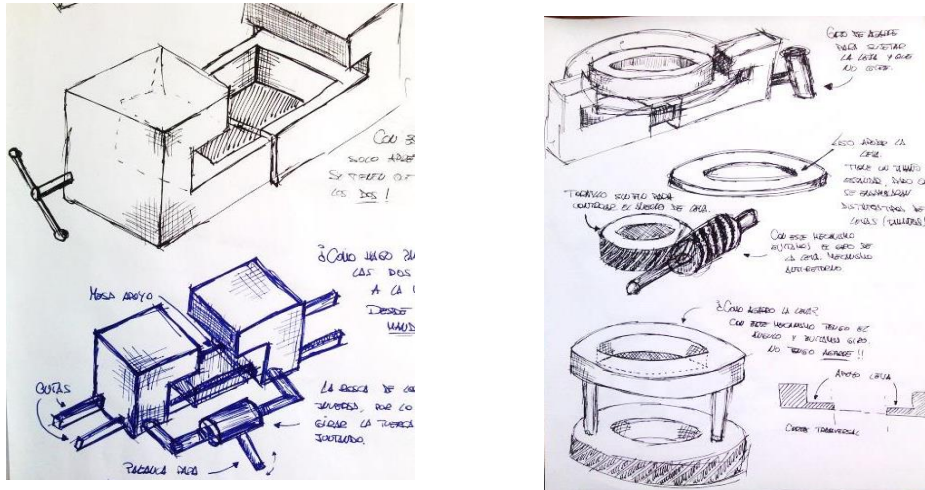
Brainstorming process for a clamping device which can fix the shaft and the ring.
